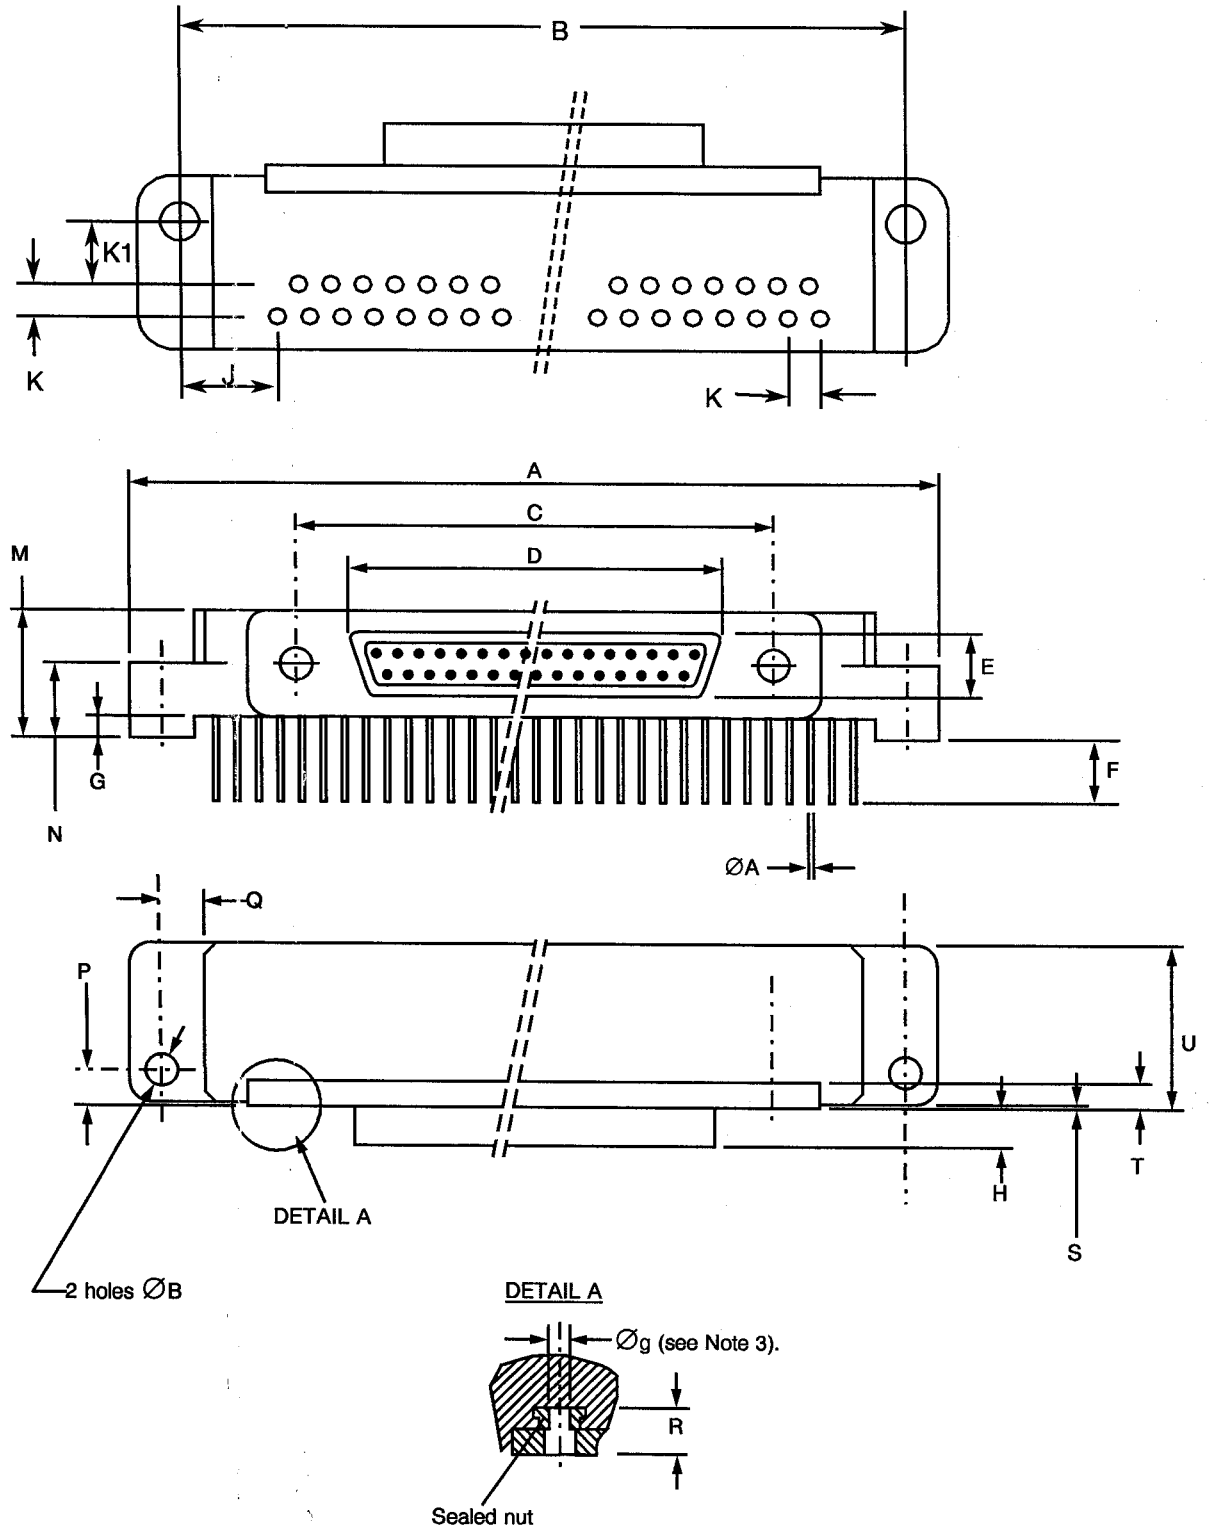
PHYSICAL DIMENSIONS (CONTINUED)
